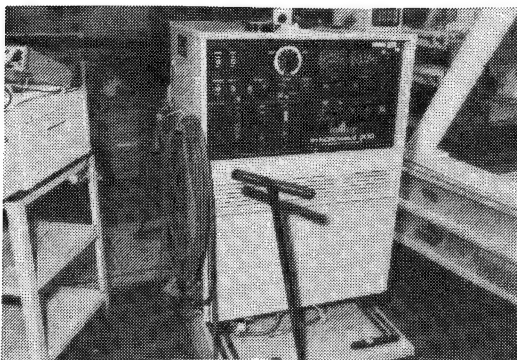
Miller Synchrowave 300 Welding Power Supply
